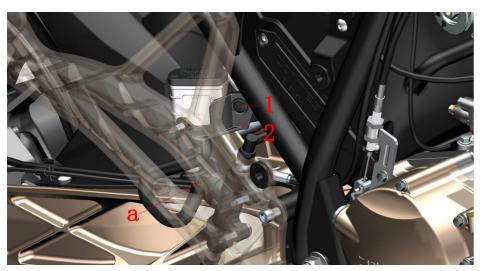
Rear wheel, swinging arm component		Rear disc brake main pump adding braking liquid	CHK	Q
